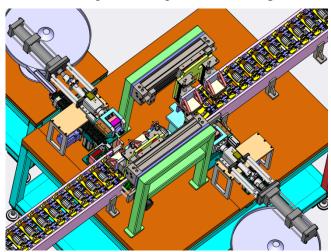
three dimensional design of automatic press fitting machine for motor rotor bearing
